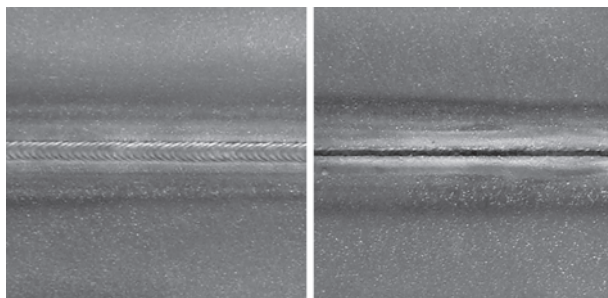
Visual aspect of the surface and root respectively of the weld (specimen with mechanically removed coating)
